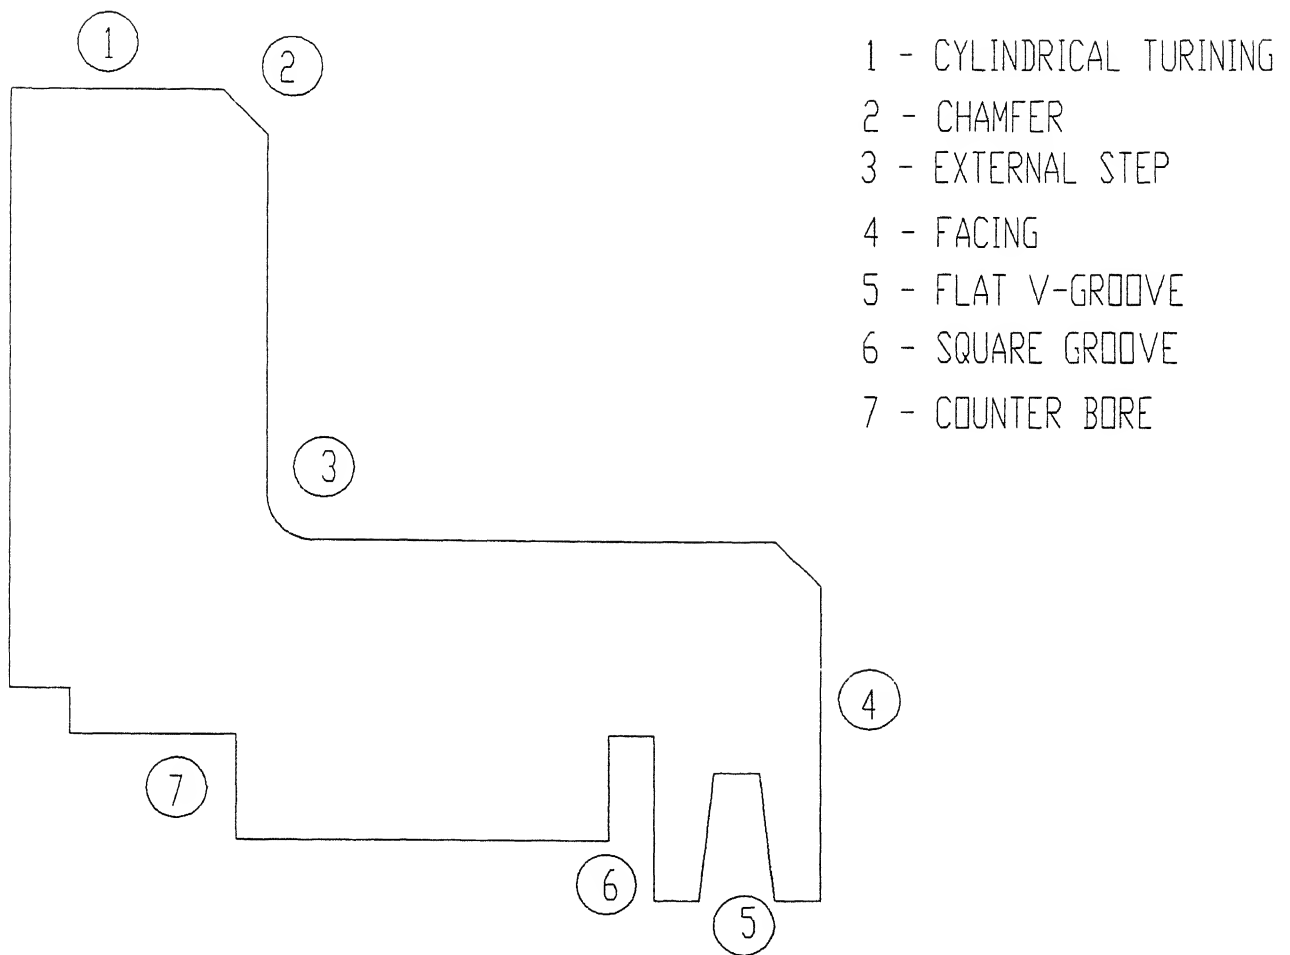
Some manufacturing features on the Example part (Half Casing of a Gear Coupling).
